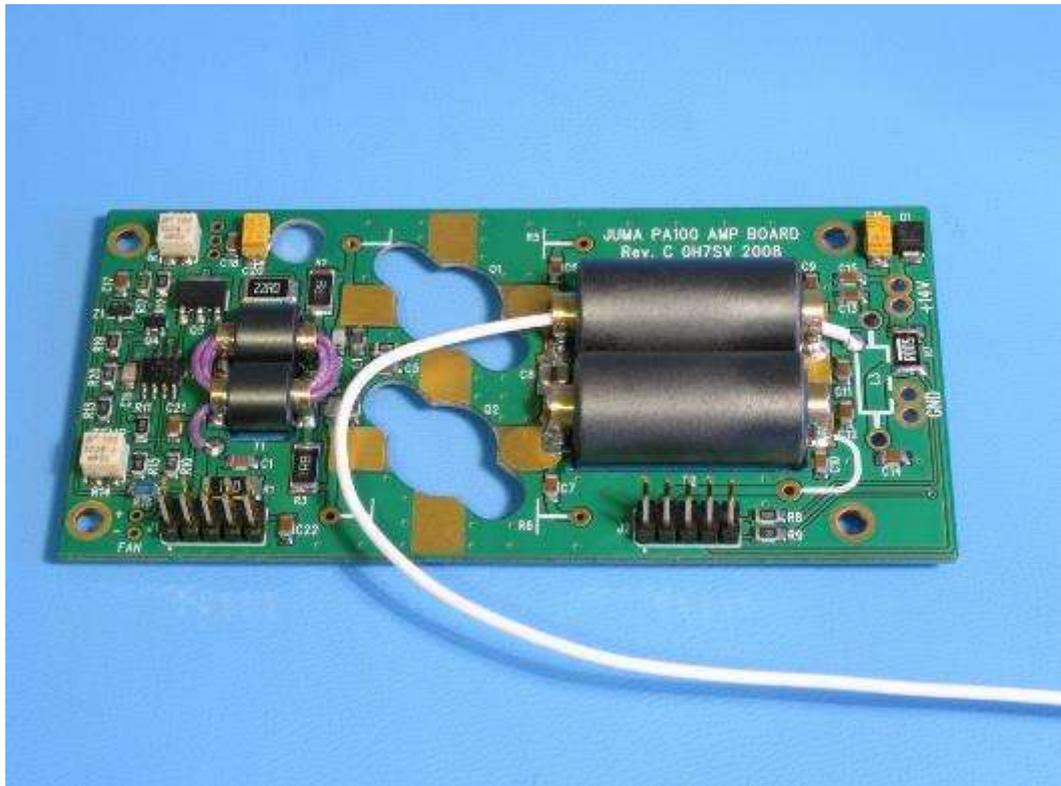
Peel one end of the thicker PTFE wire and solder the beginning of the wire.
